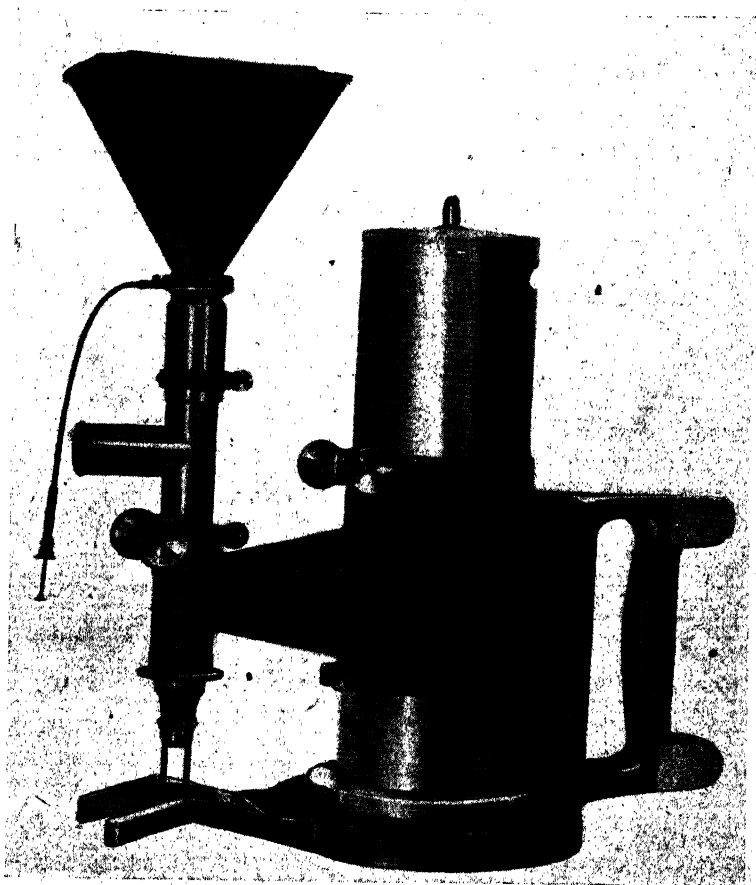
The P.V.E. surface finish measuring instrument for visual use with photographic attachment.
